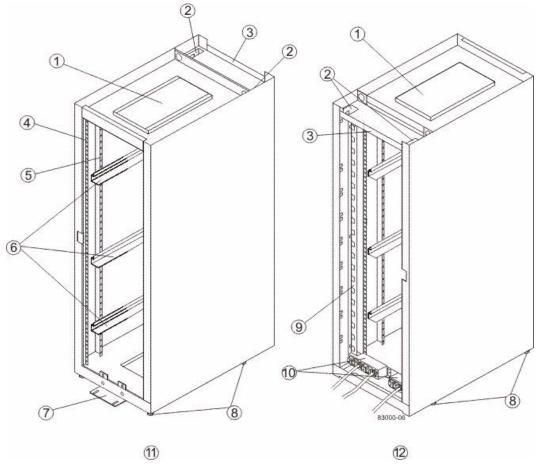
Components of the Model 3040 40U Cabinet – Front View and Rear View
